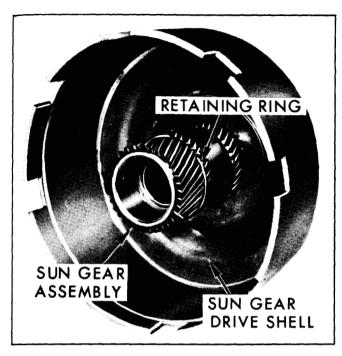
Removing Sun Gear to Drive Shell Front Steel Thrust Washer
